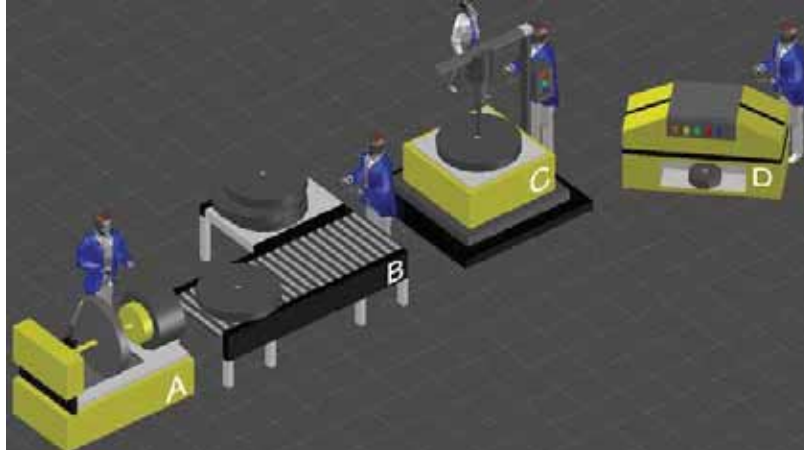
Illustration of an industrial production system, where (a) Lathe, (b) Inspection Station, (c) Drilling Machine and (d) Grinding Machine.
